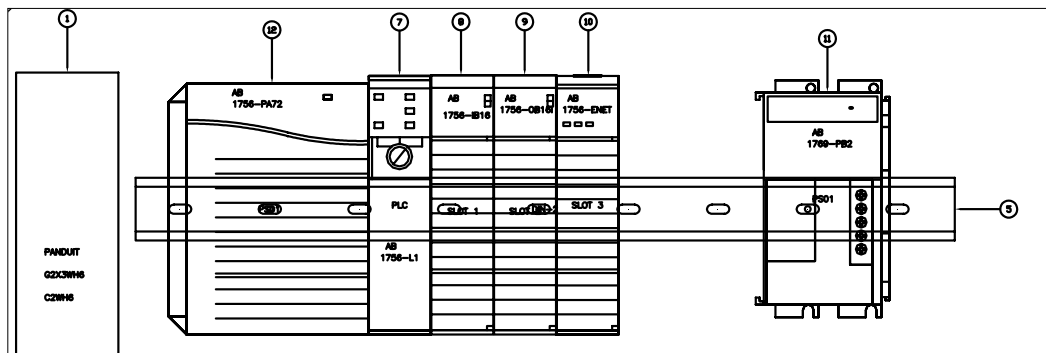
Attributes inserted in the upper part of the panel layout drawing
